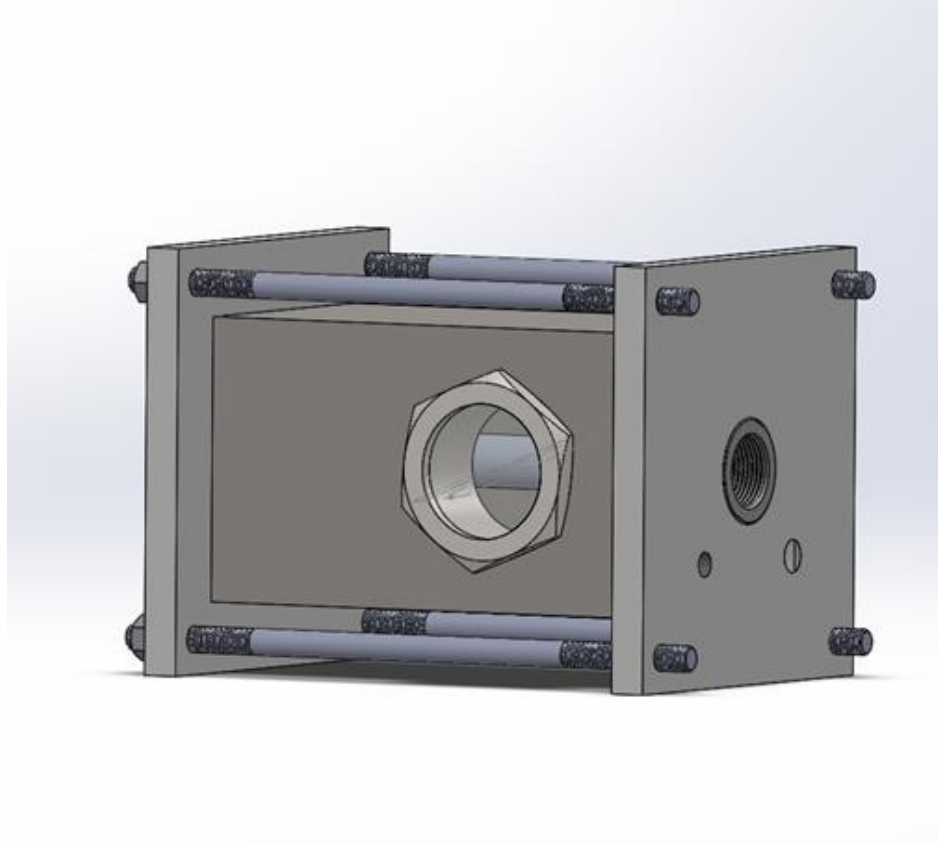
CAD of the boiling chamber housing and PTFE plates
